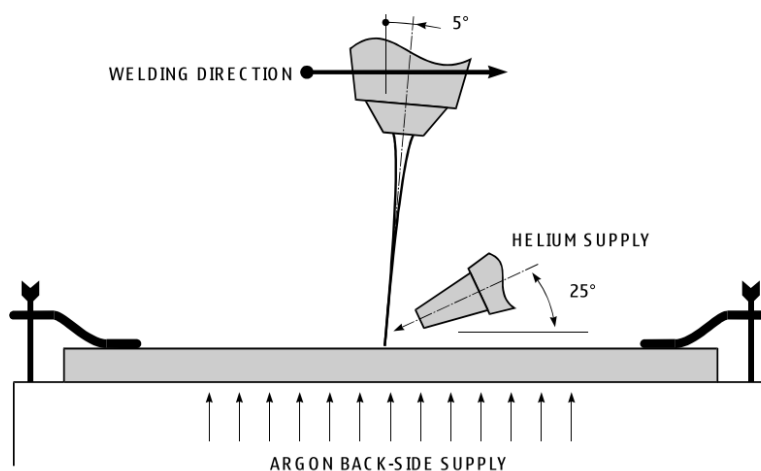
Laser welding process for aluminium processing with copper nozzle and back-side shielding (Alfieri et al. 2015)
